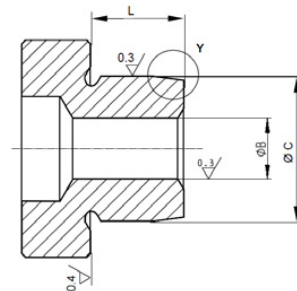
Sample of an internal grinding test piece for detailed machine tool measurement.
